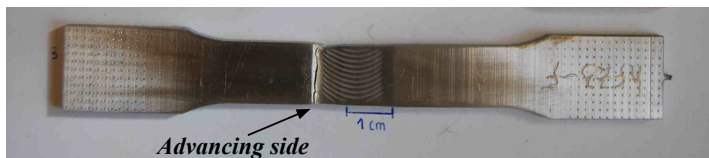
Macro image of a FS tensile specimen oriented transverse to the welding direction. The location of the fracture is indicated.
